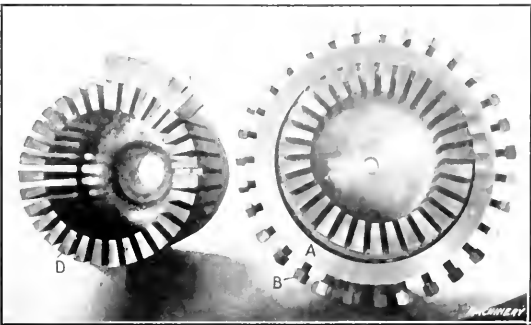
Special Chucks for holding Die and Punch Sections while Grinding
